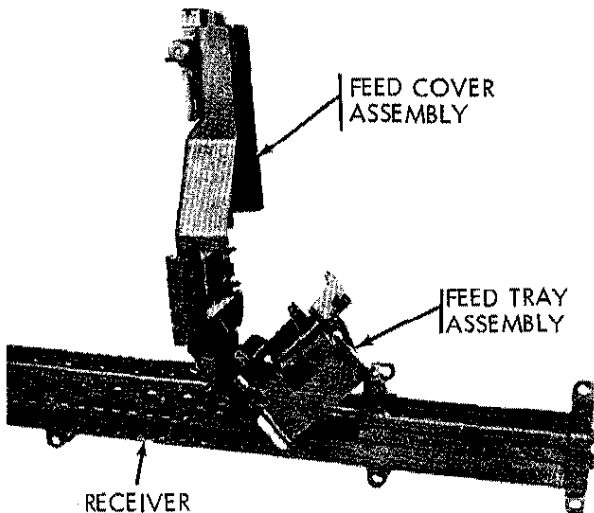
REMOVING FEED COVER AND FEED TRAY
